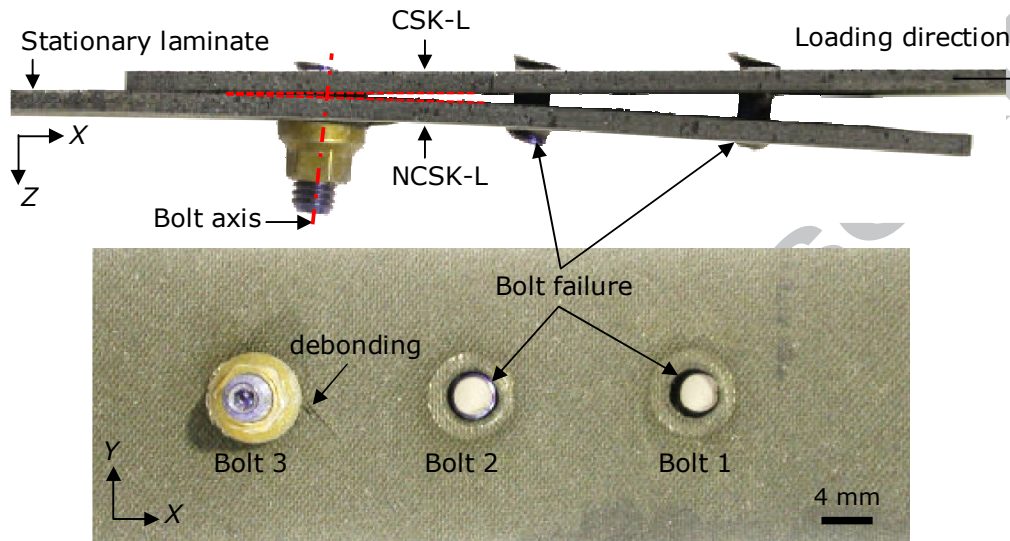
Combination of bearing and bolt failure in three-bolt CBJ
